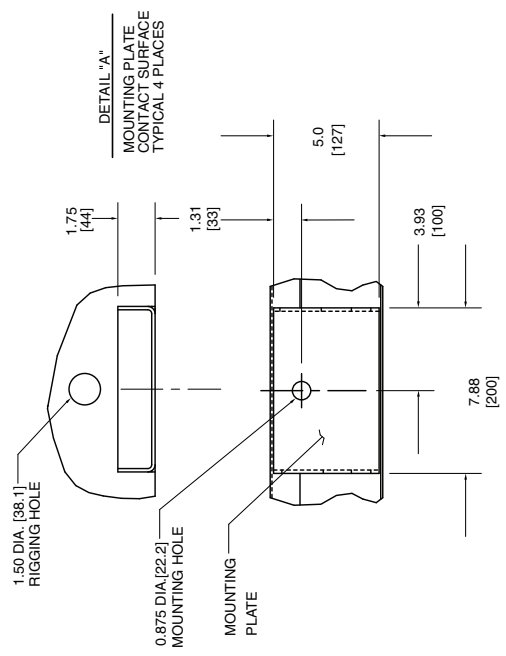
30XA090-120 Air-Cooled Liquid Chiller without Pump Dimensions (cont)
